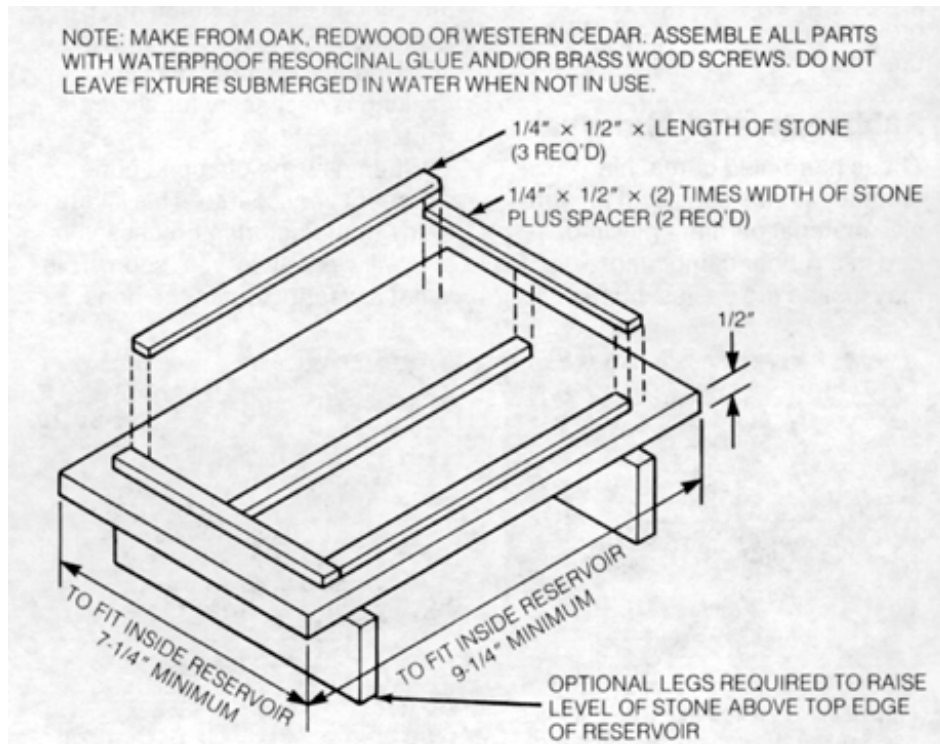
Construction details of a water stone holding fixture that sets in the water reservoir.
